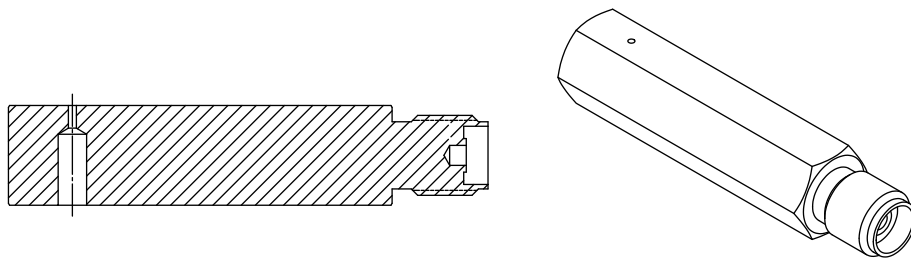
SC5296 Cable Assembly Multipurpose Tool
